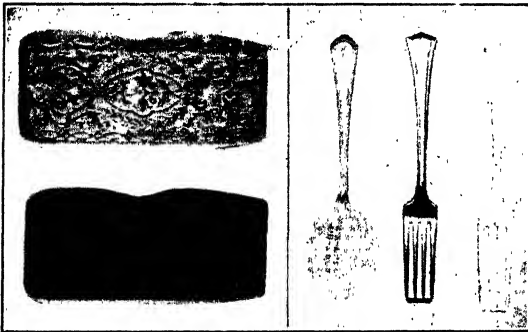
Flatware blanks coined in a 400-ton knuckle-joint press and a steel coverplate requiring a 1000-ton press to simulate etching.
